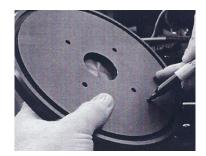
Mark the platen drive hole with that gave the minimum run-out.
